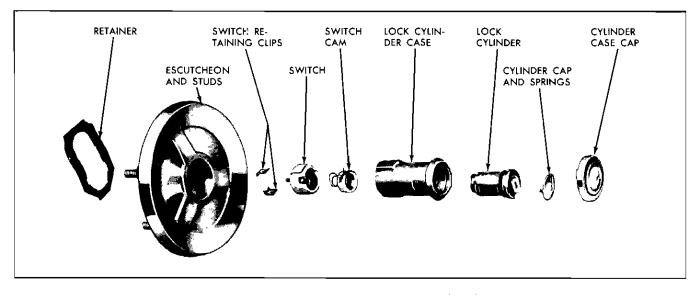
Tail Gate Lock Cylinder and Switch
